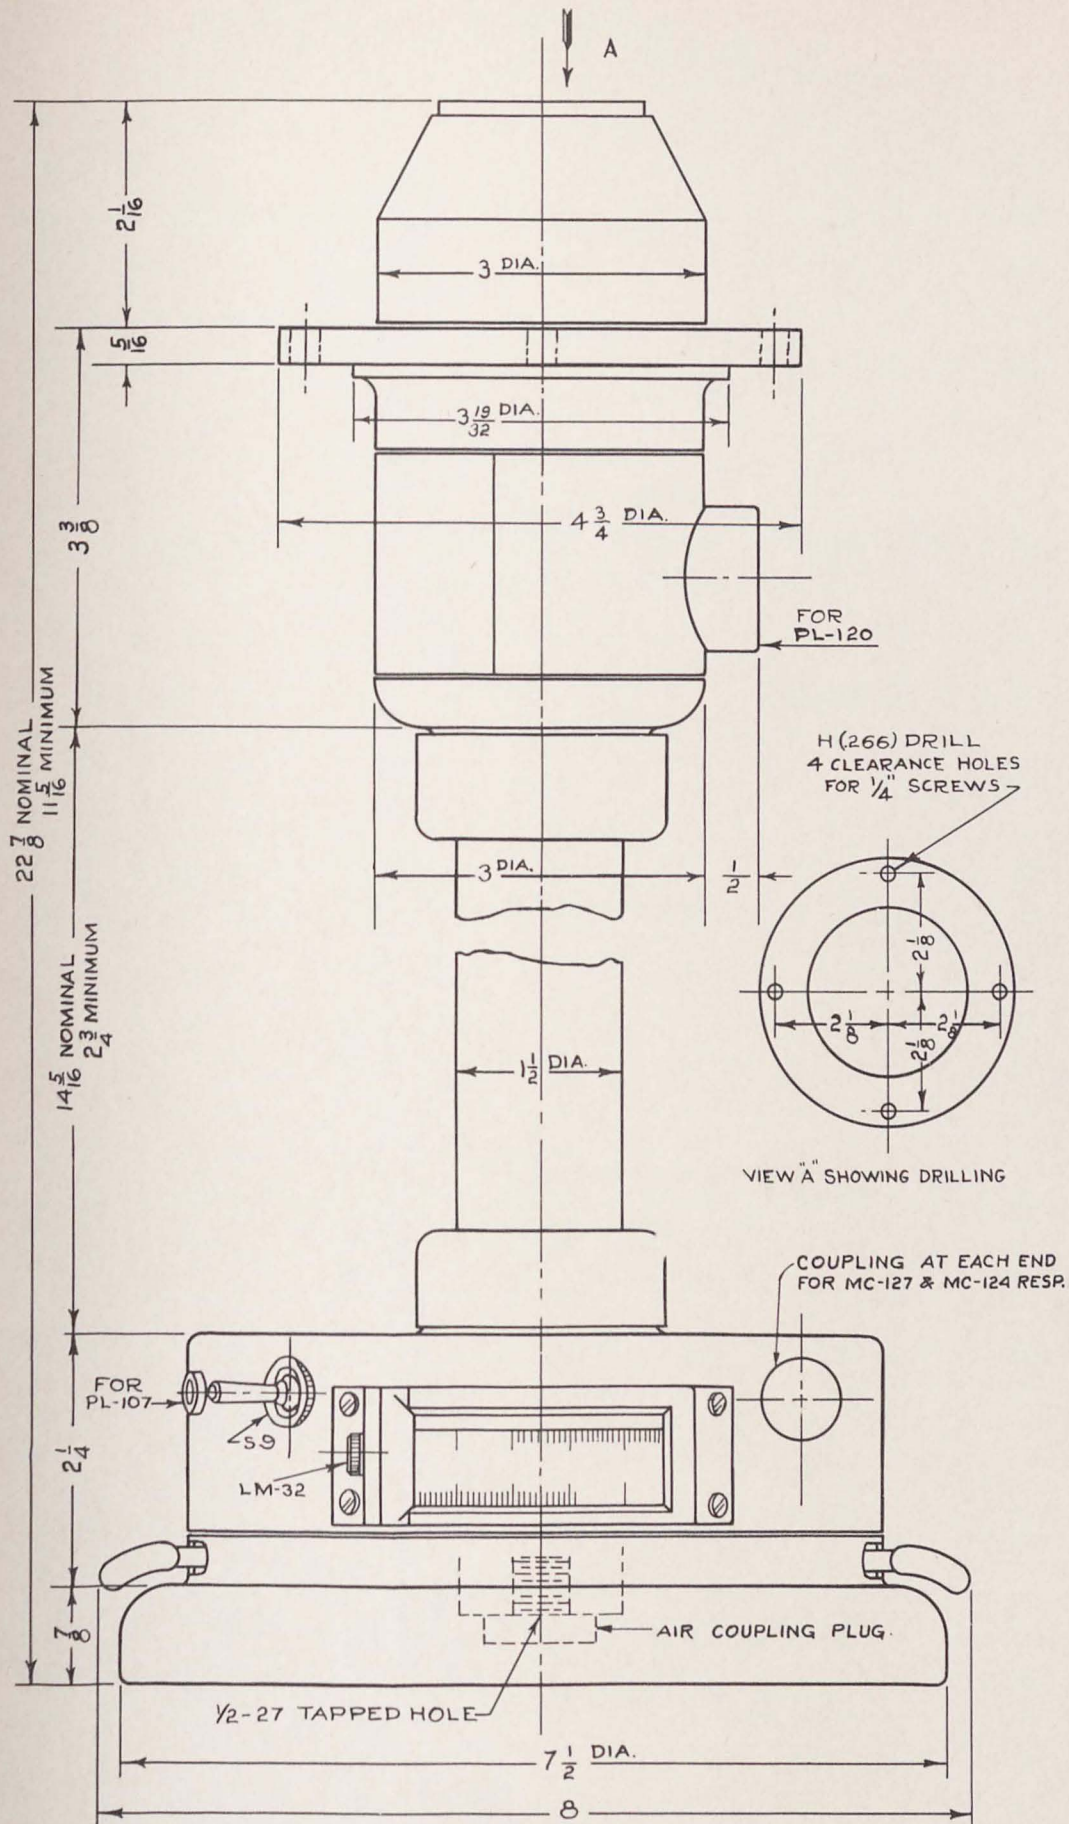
Loop Mounting GS-8-A, Outline Dimensional Drawing
